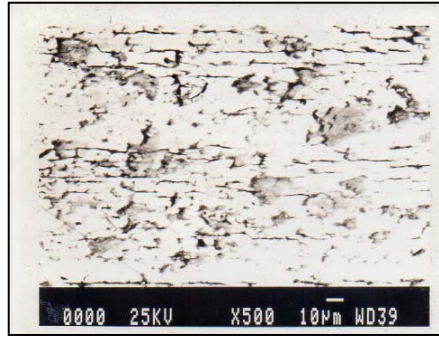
Fine cracks on the roller surface (enlarged 500 X)
